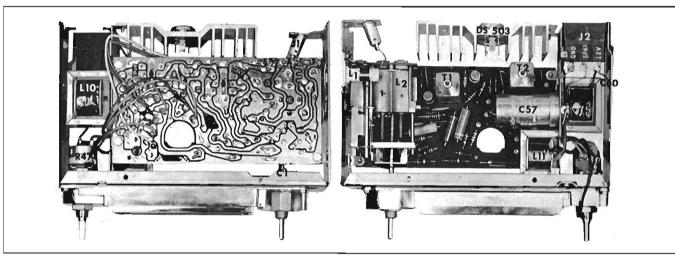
CHEVELLE PARTS LAYOUT TUNER VIEW - 986201 - RADIO
